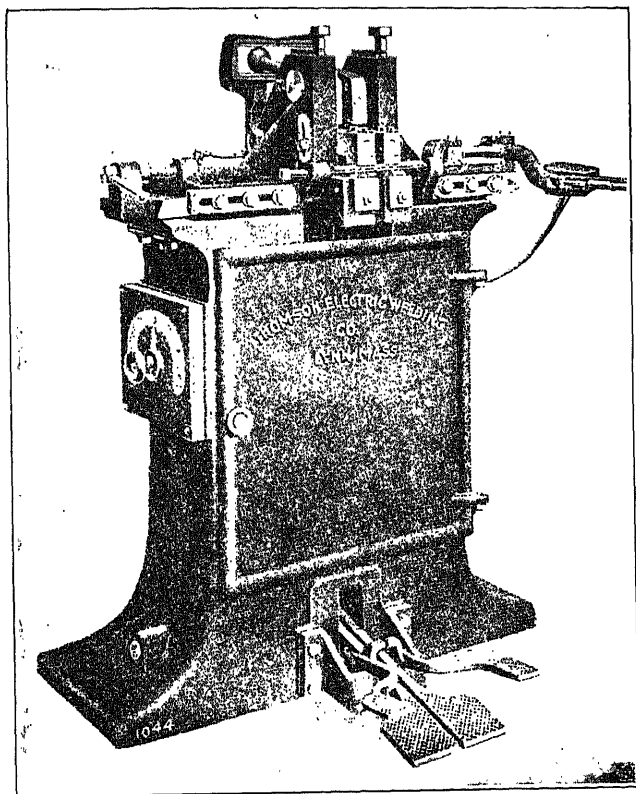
Butt-Welding Machine with Work in Jaws.
